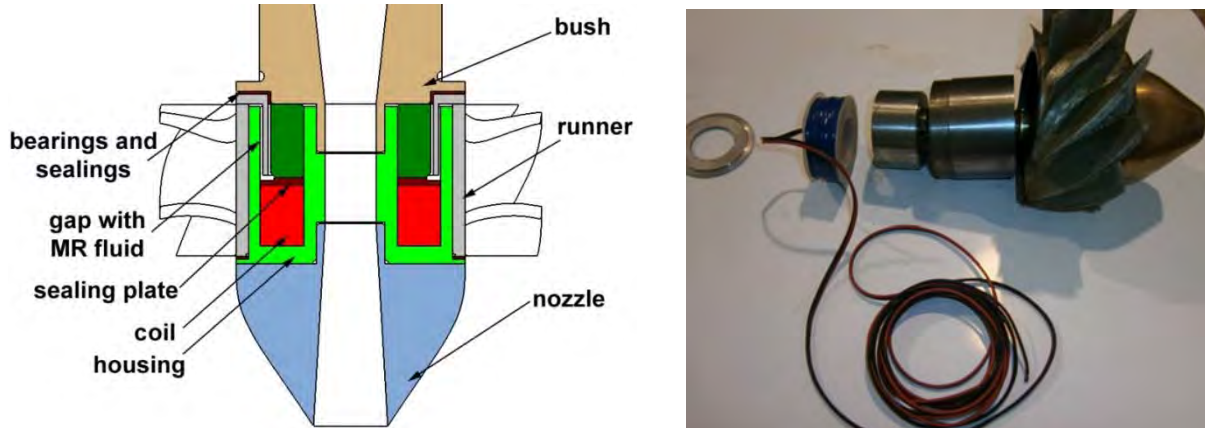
Sketch of the MRB system (left) and picture with mounted pieces (right)
